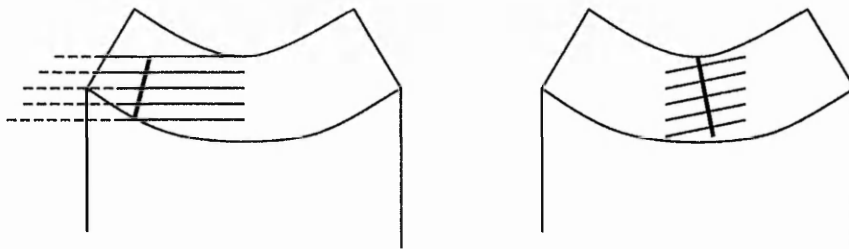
Path of contact and bearing contact of a misaligned ZK worm gear drive (a) the non-modified (b) the modified;
